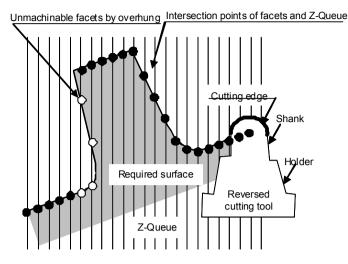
Generation of machining points on Z-Queue, and model of cutting tool
